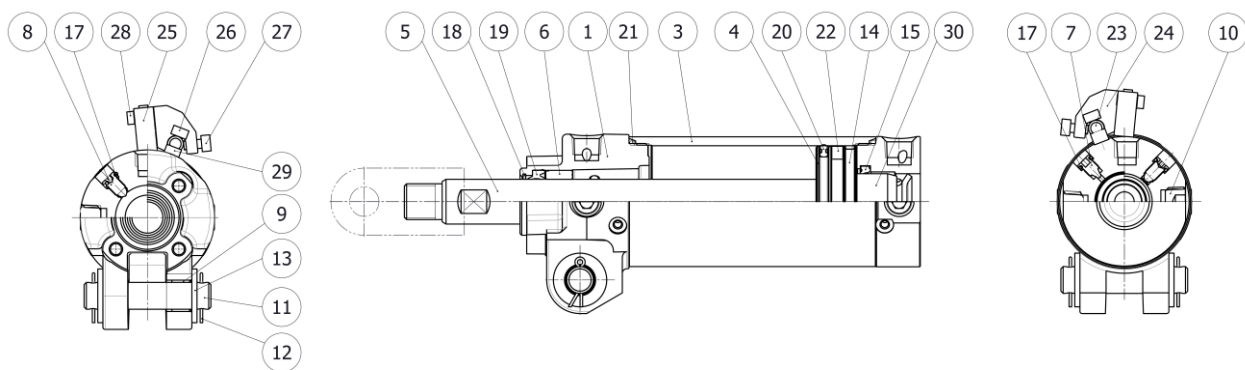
Construction of the standard built-in magnet clamp cylinder
